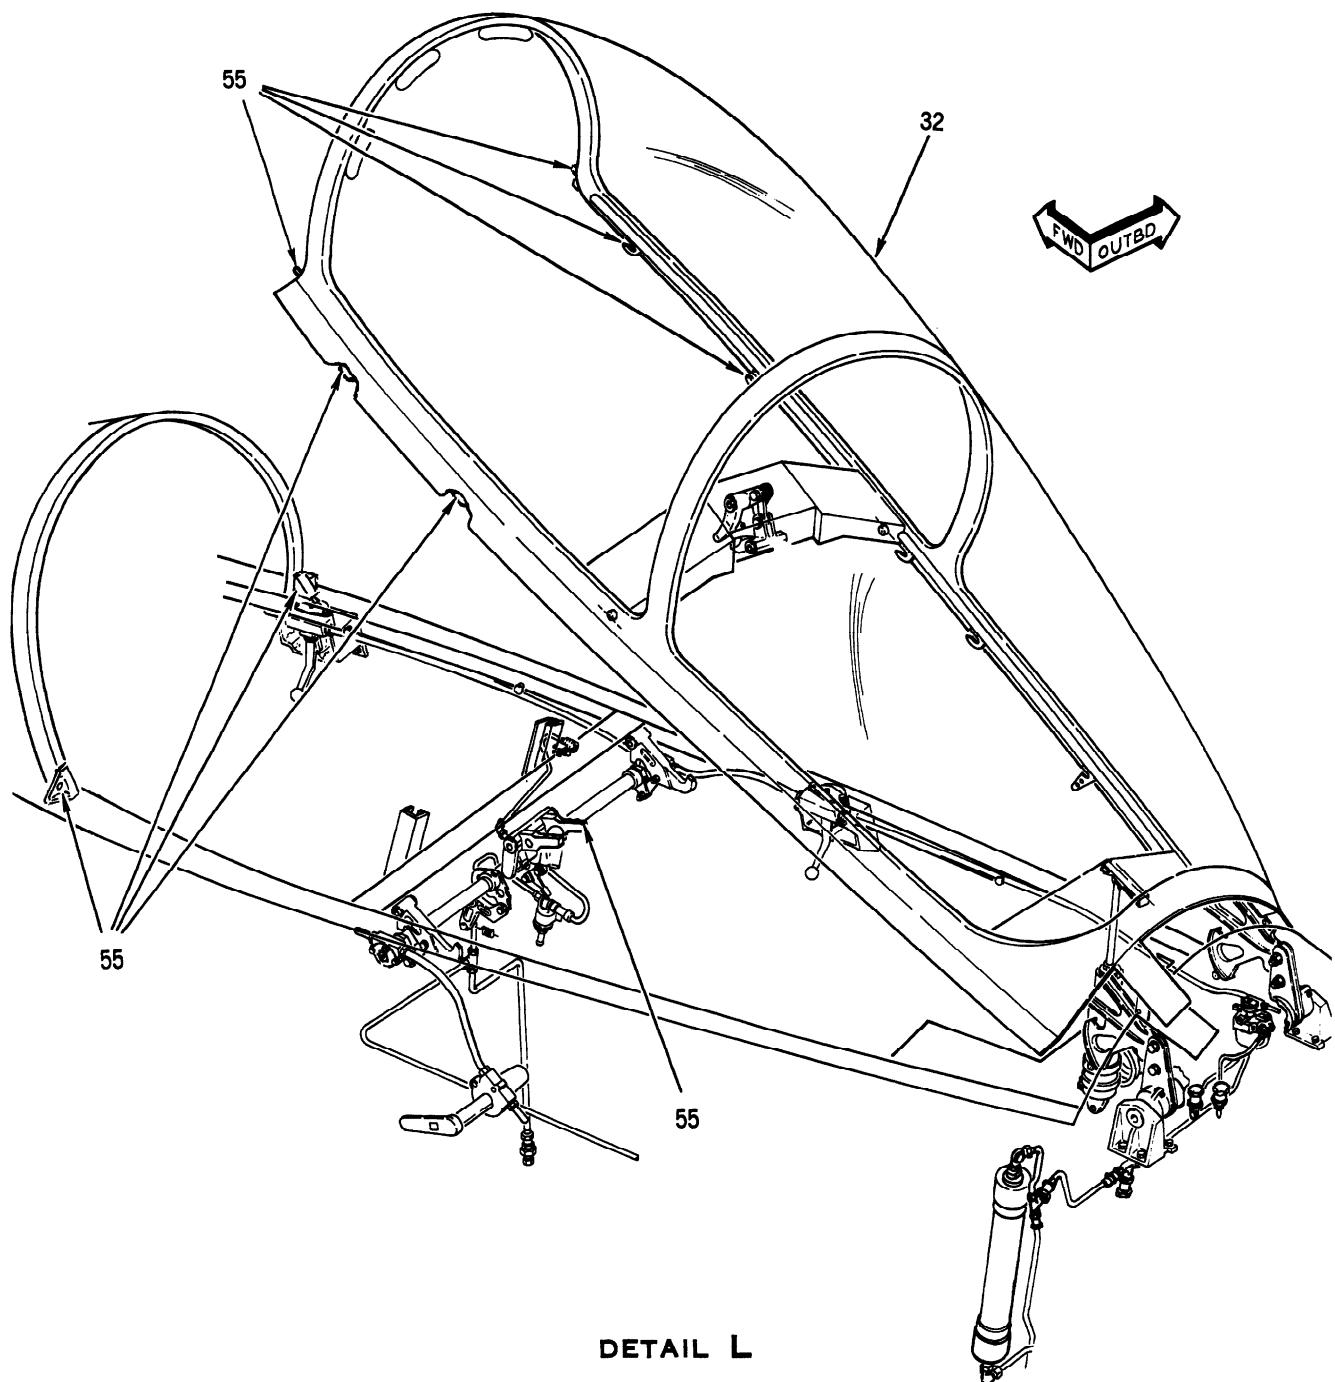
Detailed Visual Inspection (Sheet 6)
